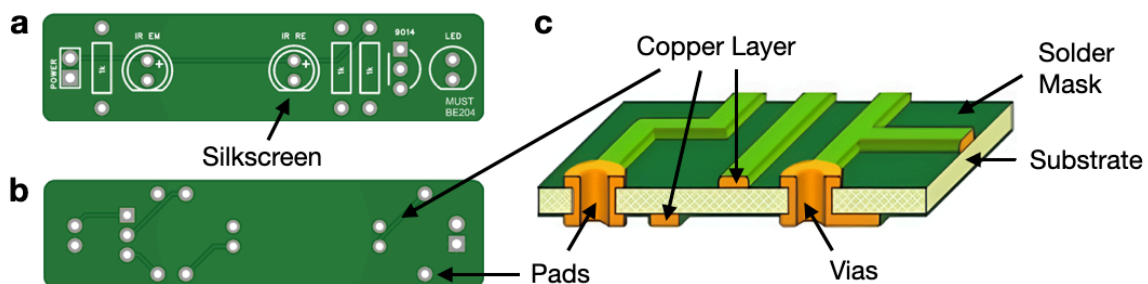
a and b the front and back sides of a two-layer PCB. c the layer structure of the PCB.
